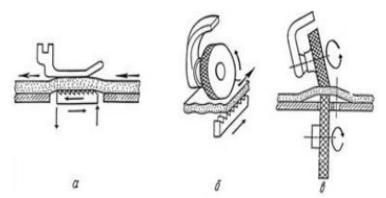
Crosslinking transport mechanisms: a - Rack and pin; b - Rack and roller; c - Roller and bottom conveyor ring
